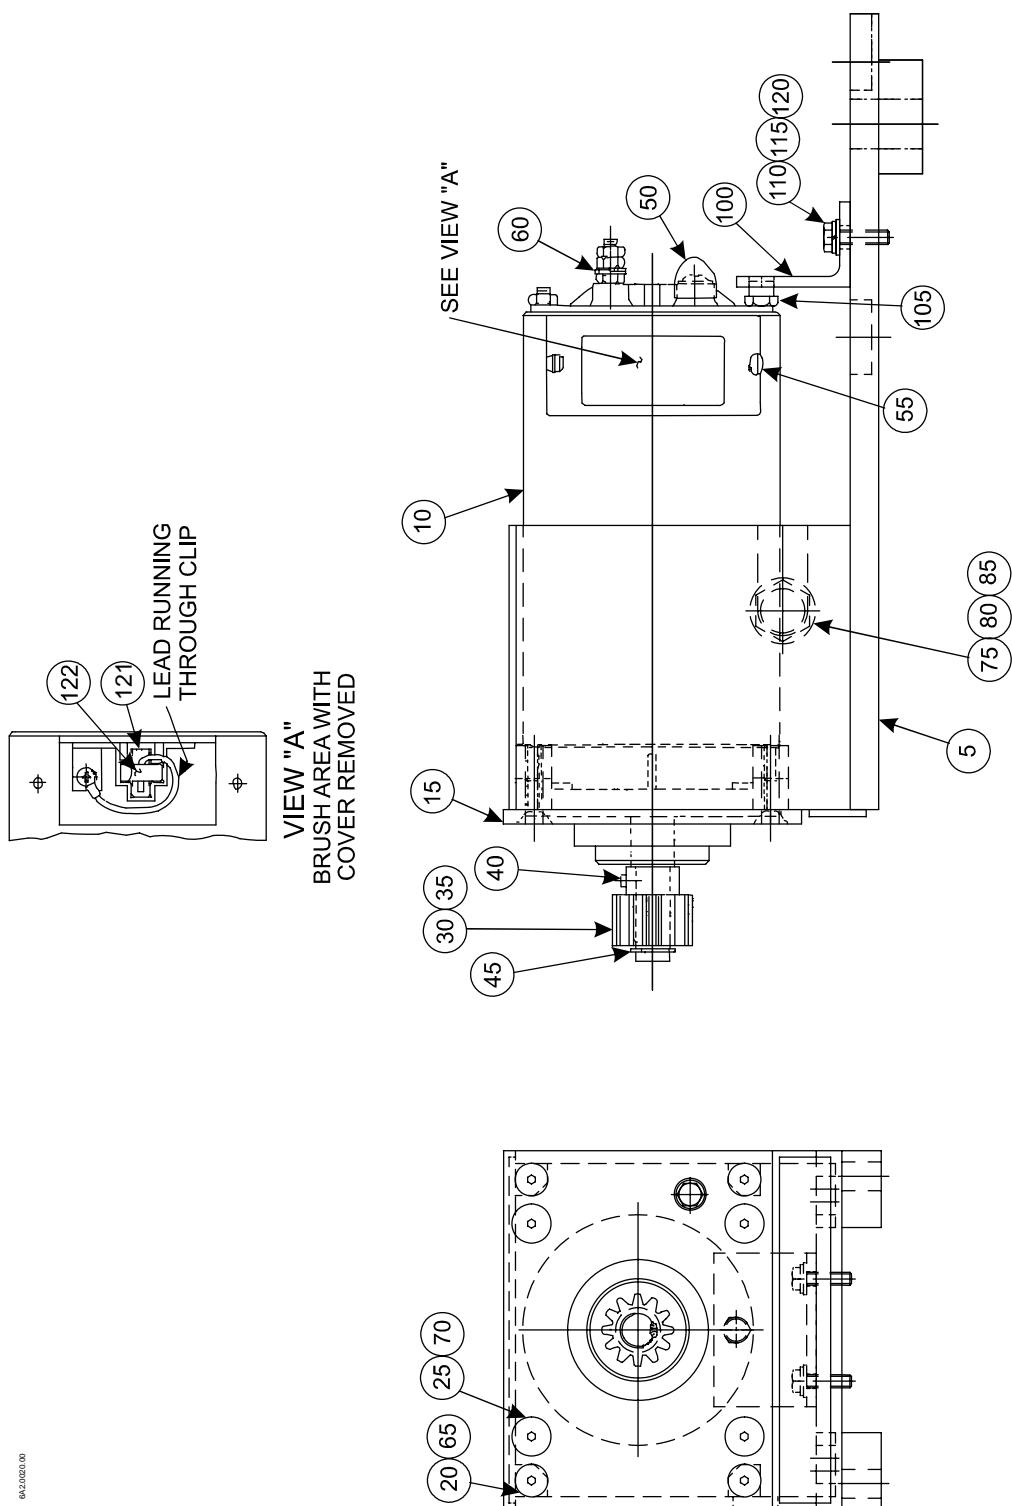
Motor Assembly (N451161-1706) Parts Location
